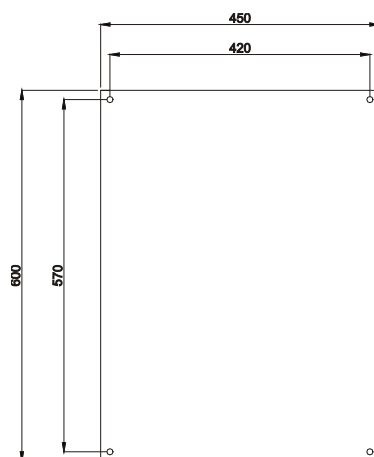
Wall-mounting hole position of the plate 450x600 mm
